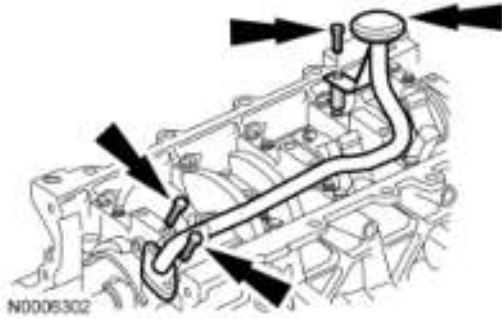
Positioning Oil Pump Screen, Pickup Tube And Installing Bolts
